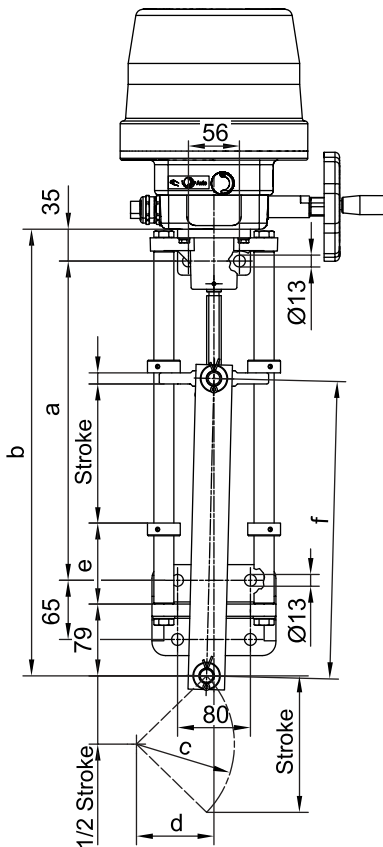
Series NEx-K – assembly dimensions and radius of motion
